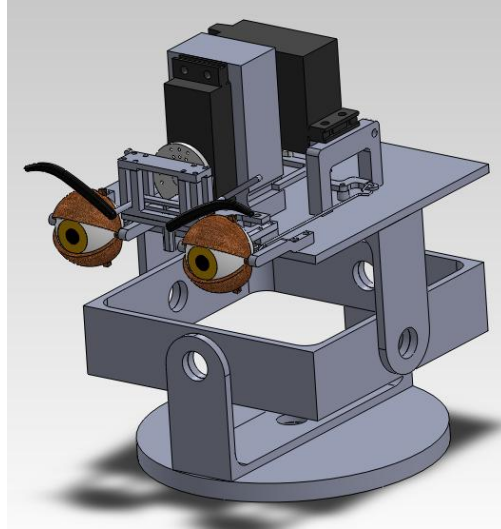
Initial Assembly with Eyebrow and Eye Yaw Subassemblies
